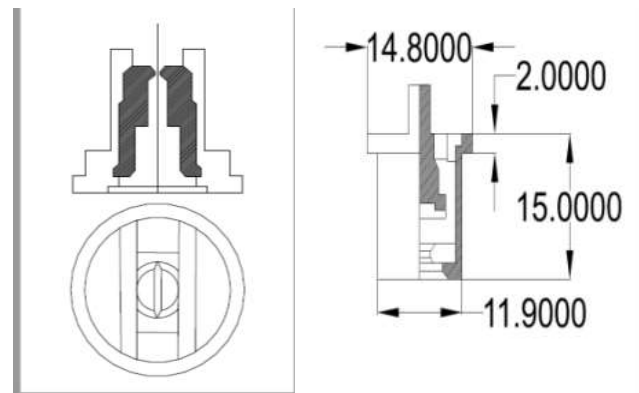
2-D views of spray nozzle flat fan and hollow cone
